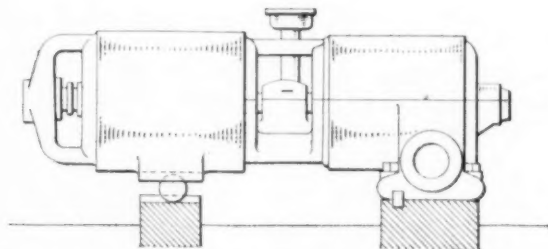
RIGID-FRAME DESIGN OF TURBINE AND PUMP
